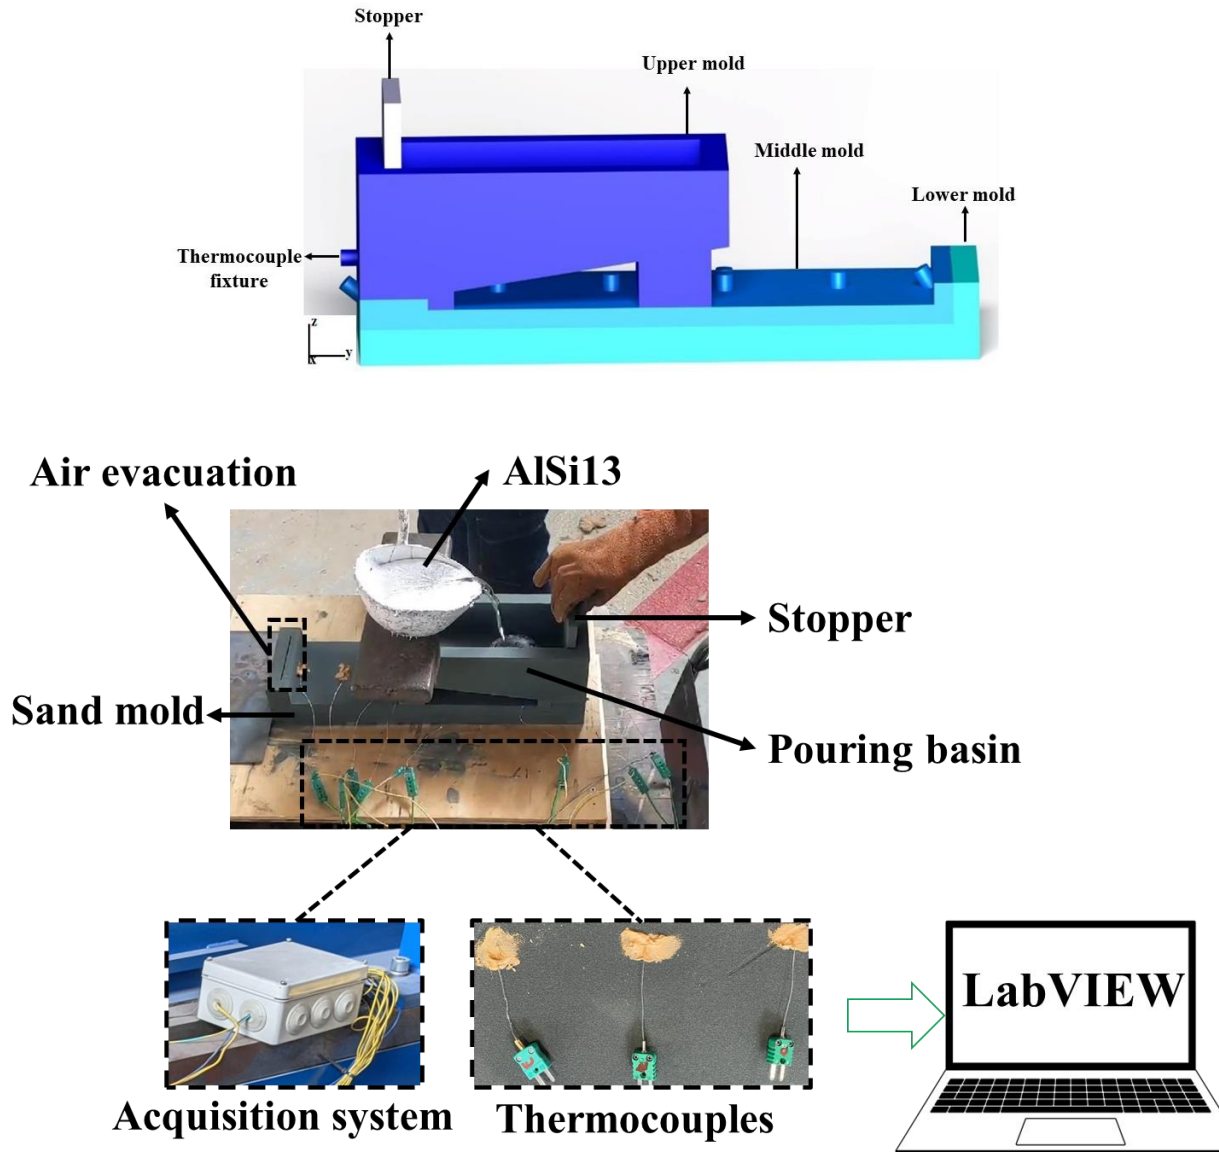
Geometry of mold a) Top: Designing by CATIA b) Bottom: Experimental test platform
